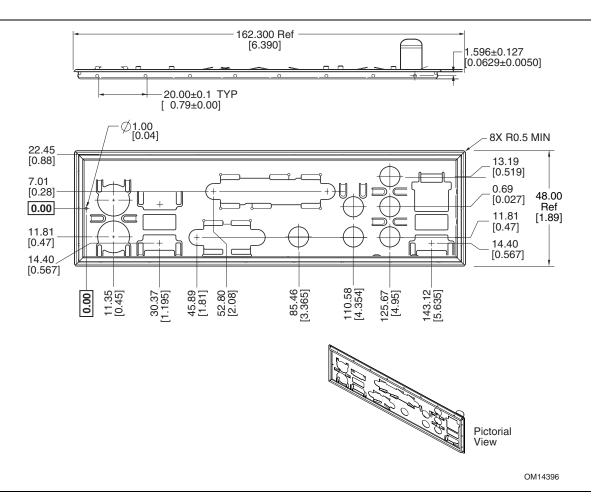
I/O Shield Dimensions (for Boards with the 6-Channel Audio Subsystem)
